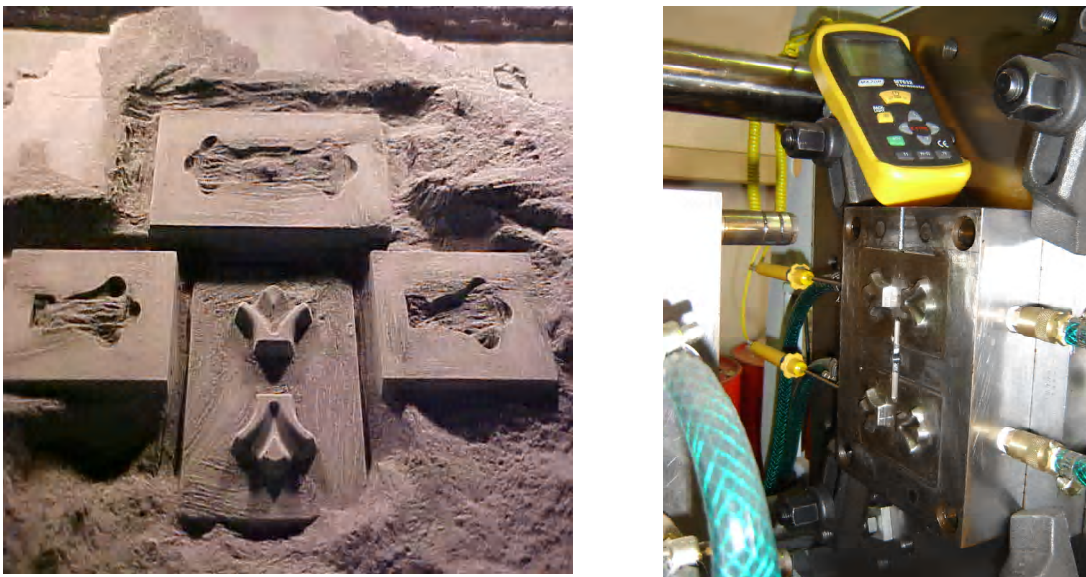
Pictures of the grown inserts inside the DTM 2000 machine as well as the inserts inside the bolster
